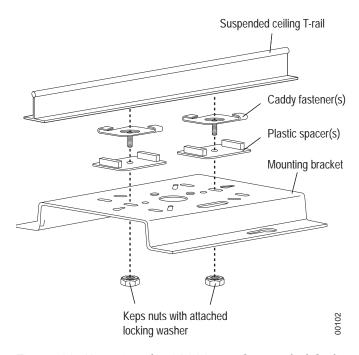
Mounting the AP200 to a Suspended Ceiling Rail
